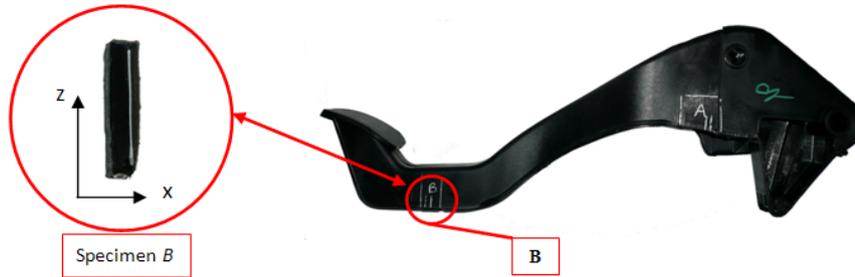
the clutch pedal - SIDE VIEW: position of the specimen B.
